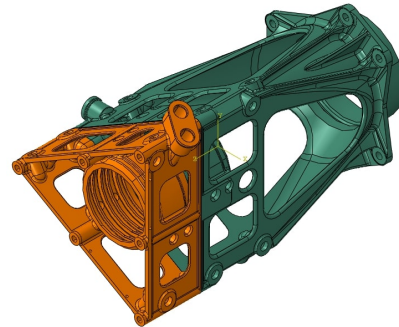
Current component containing the upper manifold (green), and lower manifold (orange).
